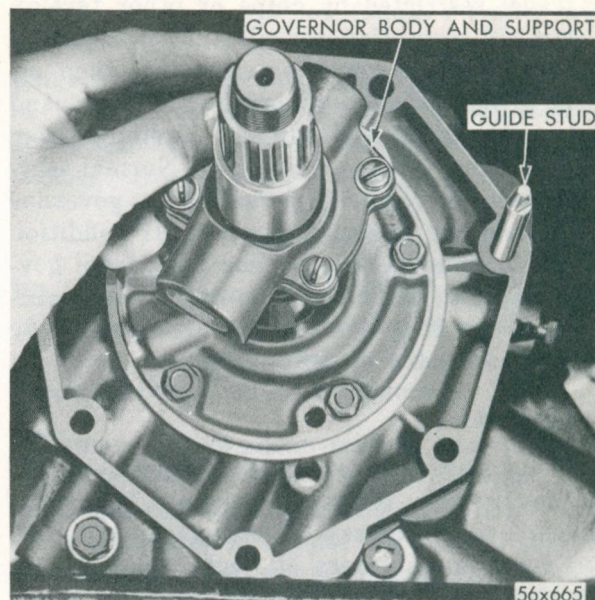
Removal and Installation of Governor Body and Support Assembly
